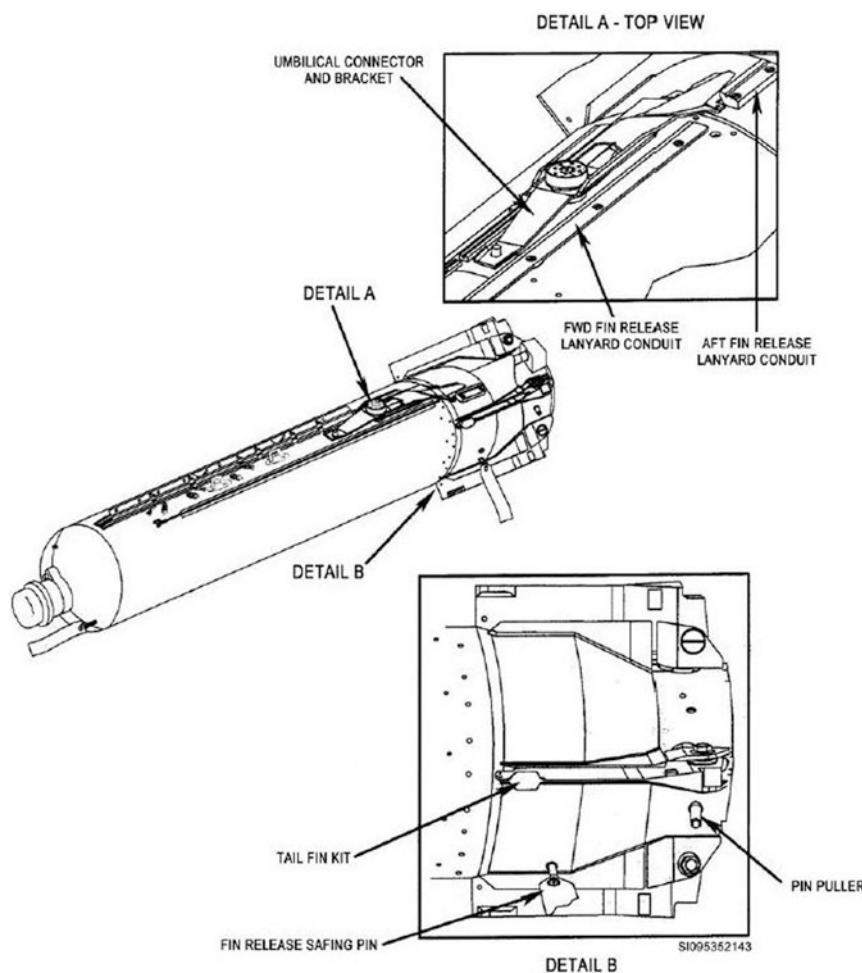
Typical CBU-103, -104, -105 wind-corrected dispensers.
